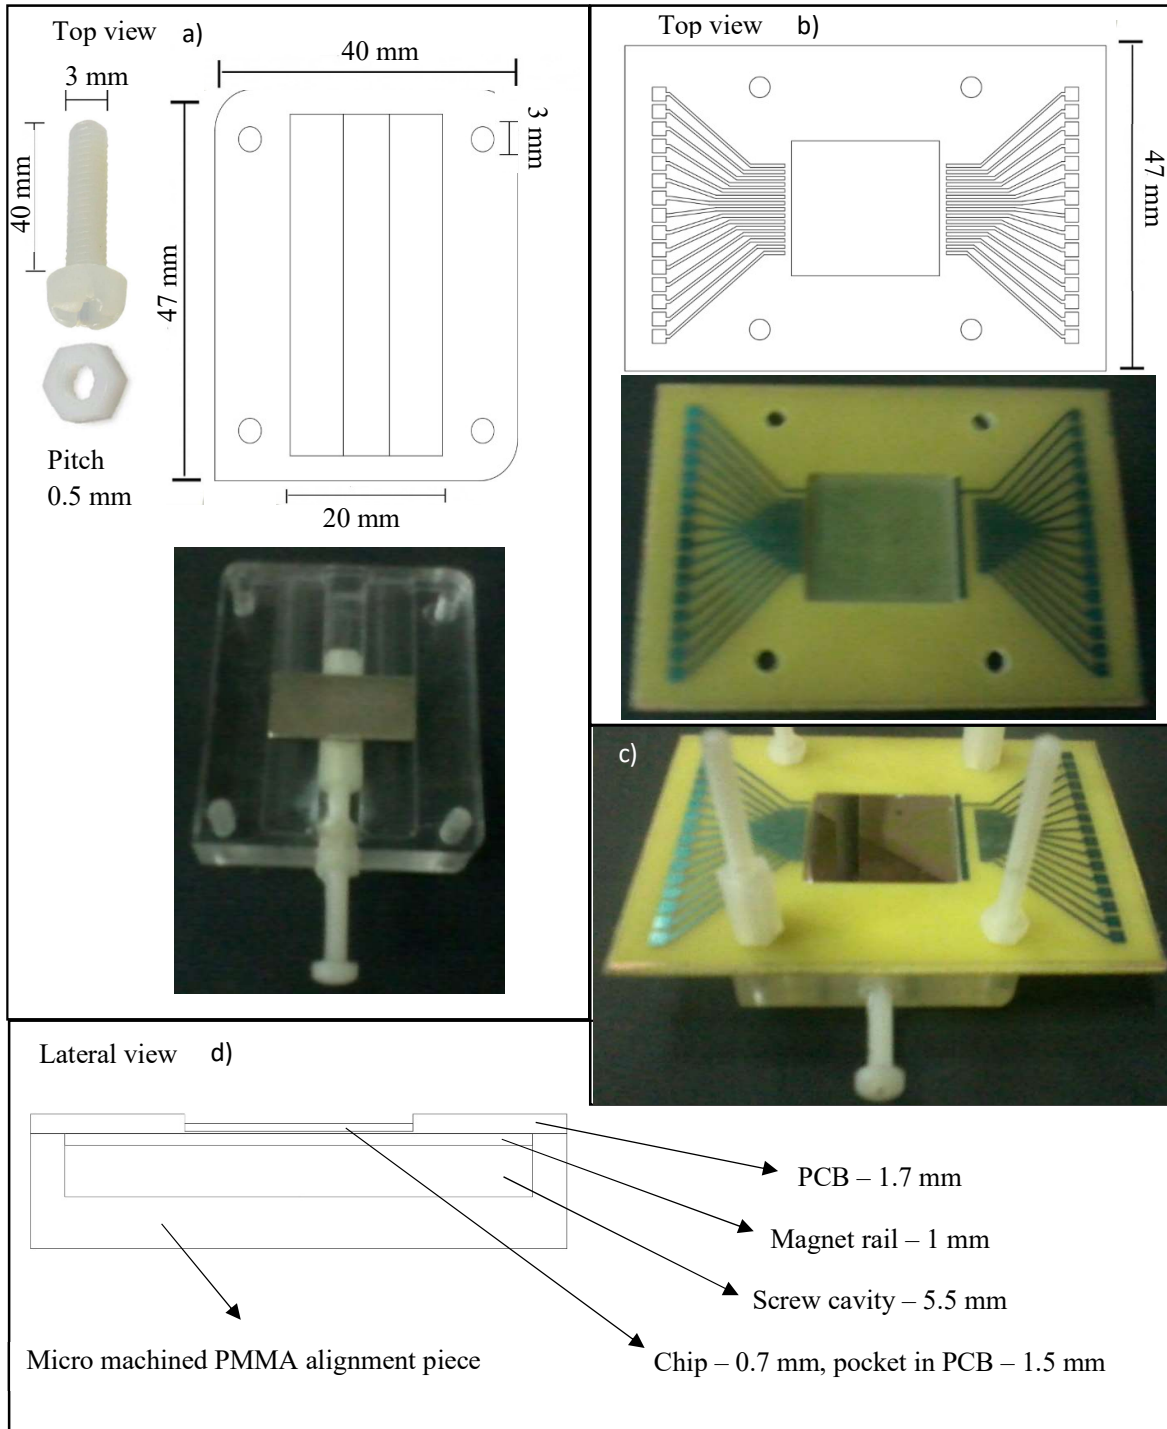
PM - Chip Alignment system (c). Bottom piece constituted by a PMMA micromachined plate, a screw and a set of nuts (a) and top piece constituted by the pocketed PCB and 4 alignment holes (b). Lateral view of the PM - Chip alignment system (d).
